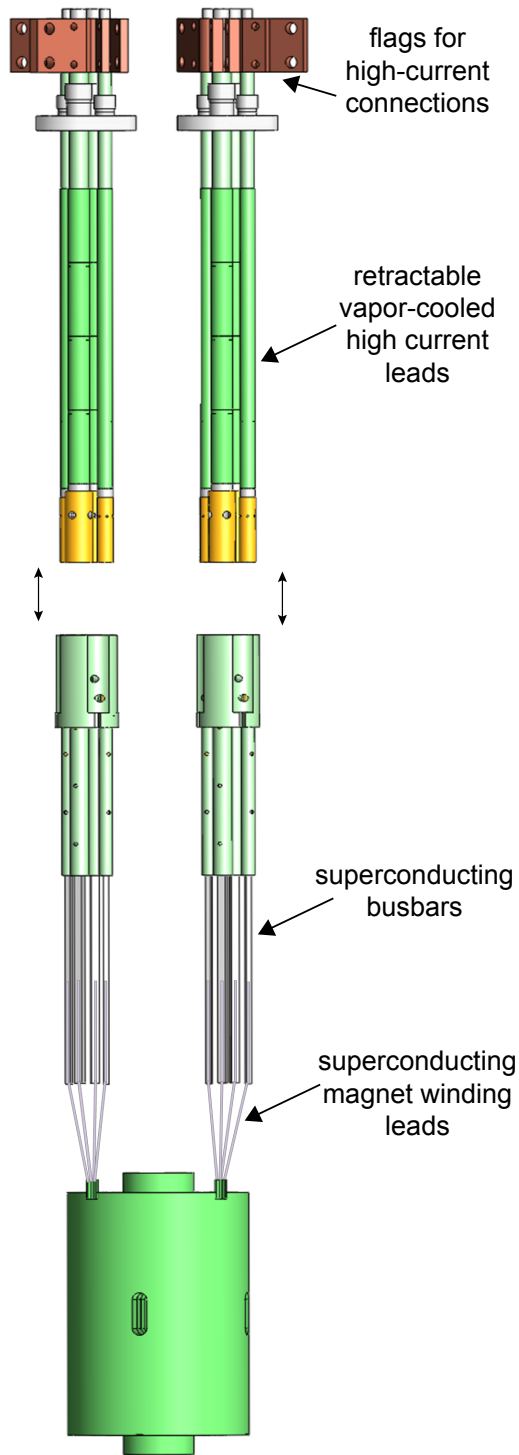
Lead and Magnet Assembly. Retractable leads (shown retracted) connect to superconducting busbars which are soldered to the magnet windings.
